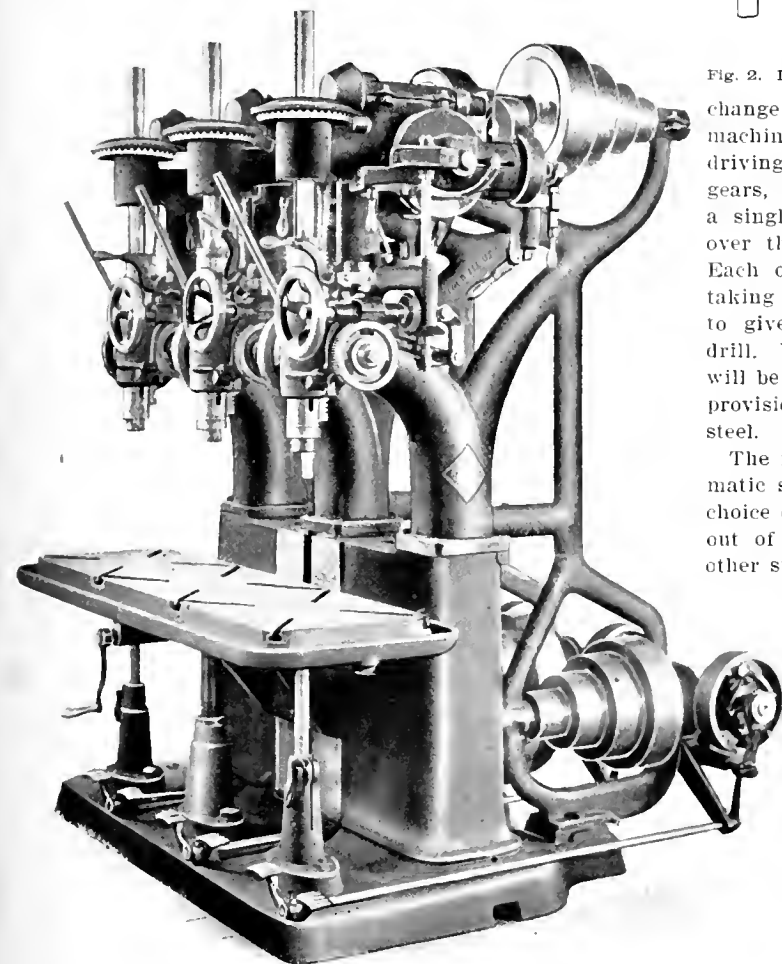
Gang Drill with Improved Counter-shaft Drive and Feed Mechanism. The full length of the long sleeve shown above the bevel gear. The friction clutches are mounted on a shaft parallel with the spindle. The upper driving shaft is connected by the usual bevel gearing with an idler gear, concentric to the spin-
